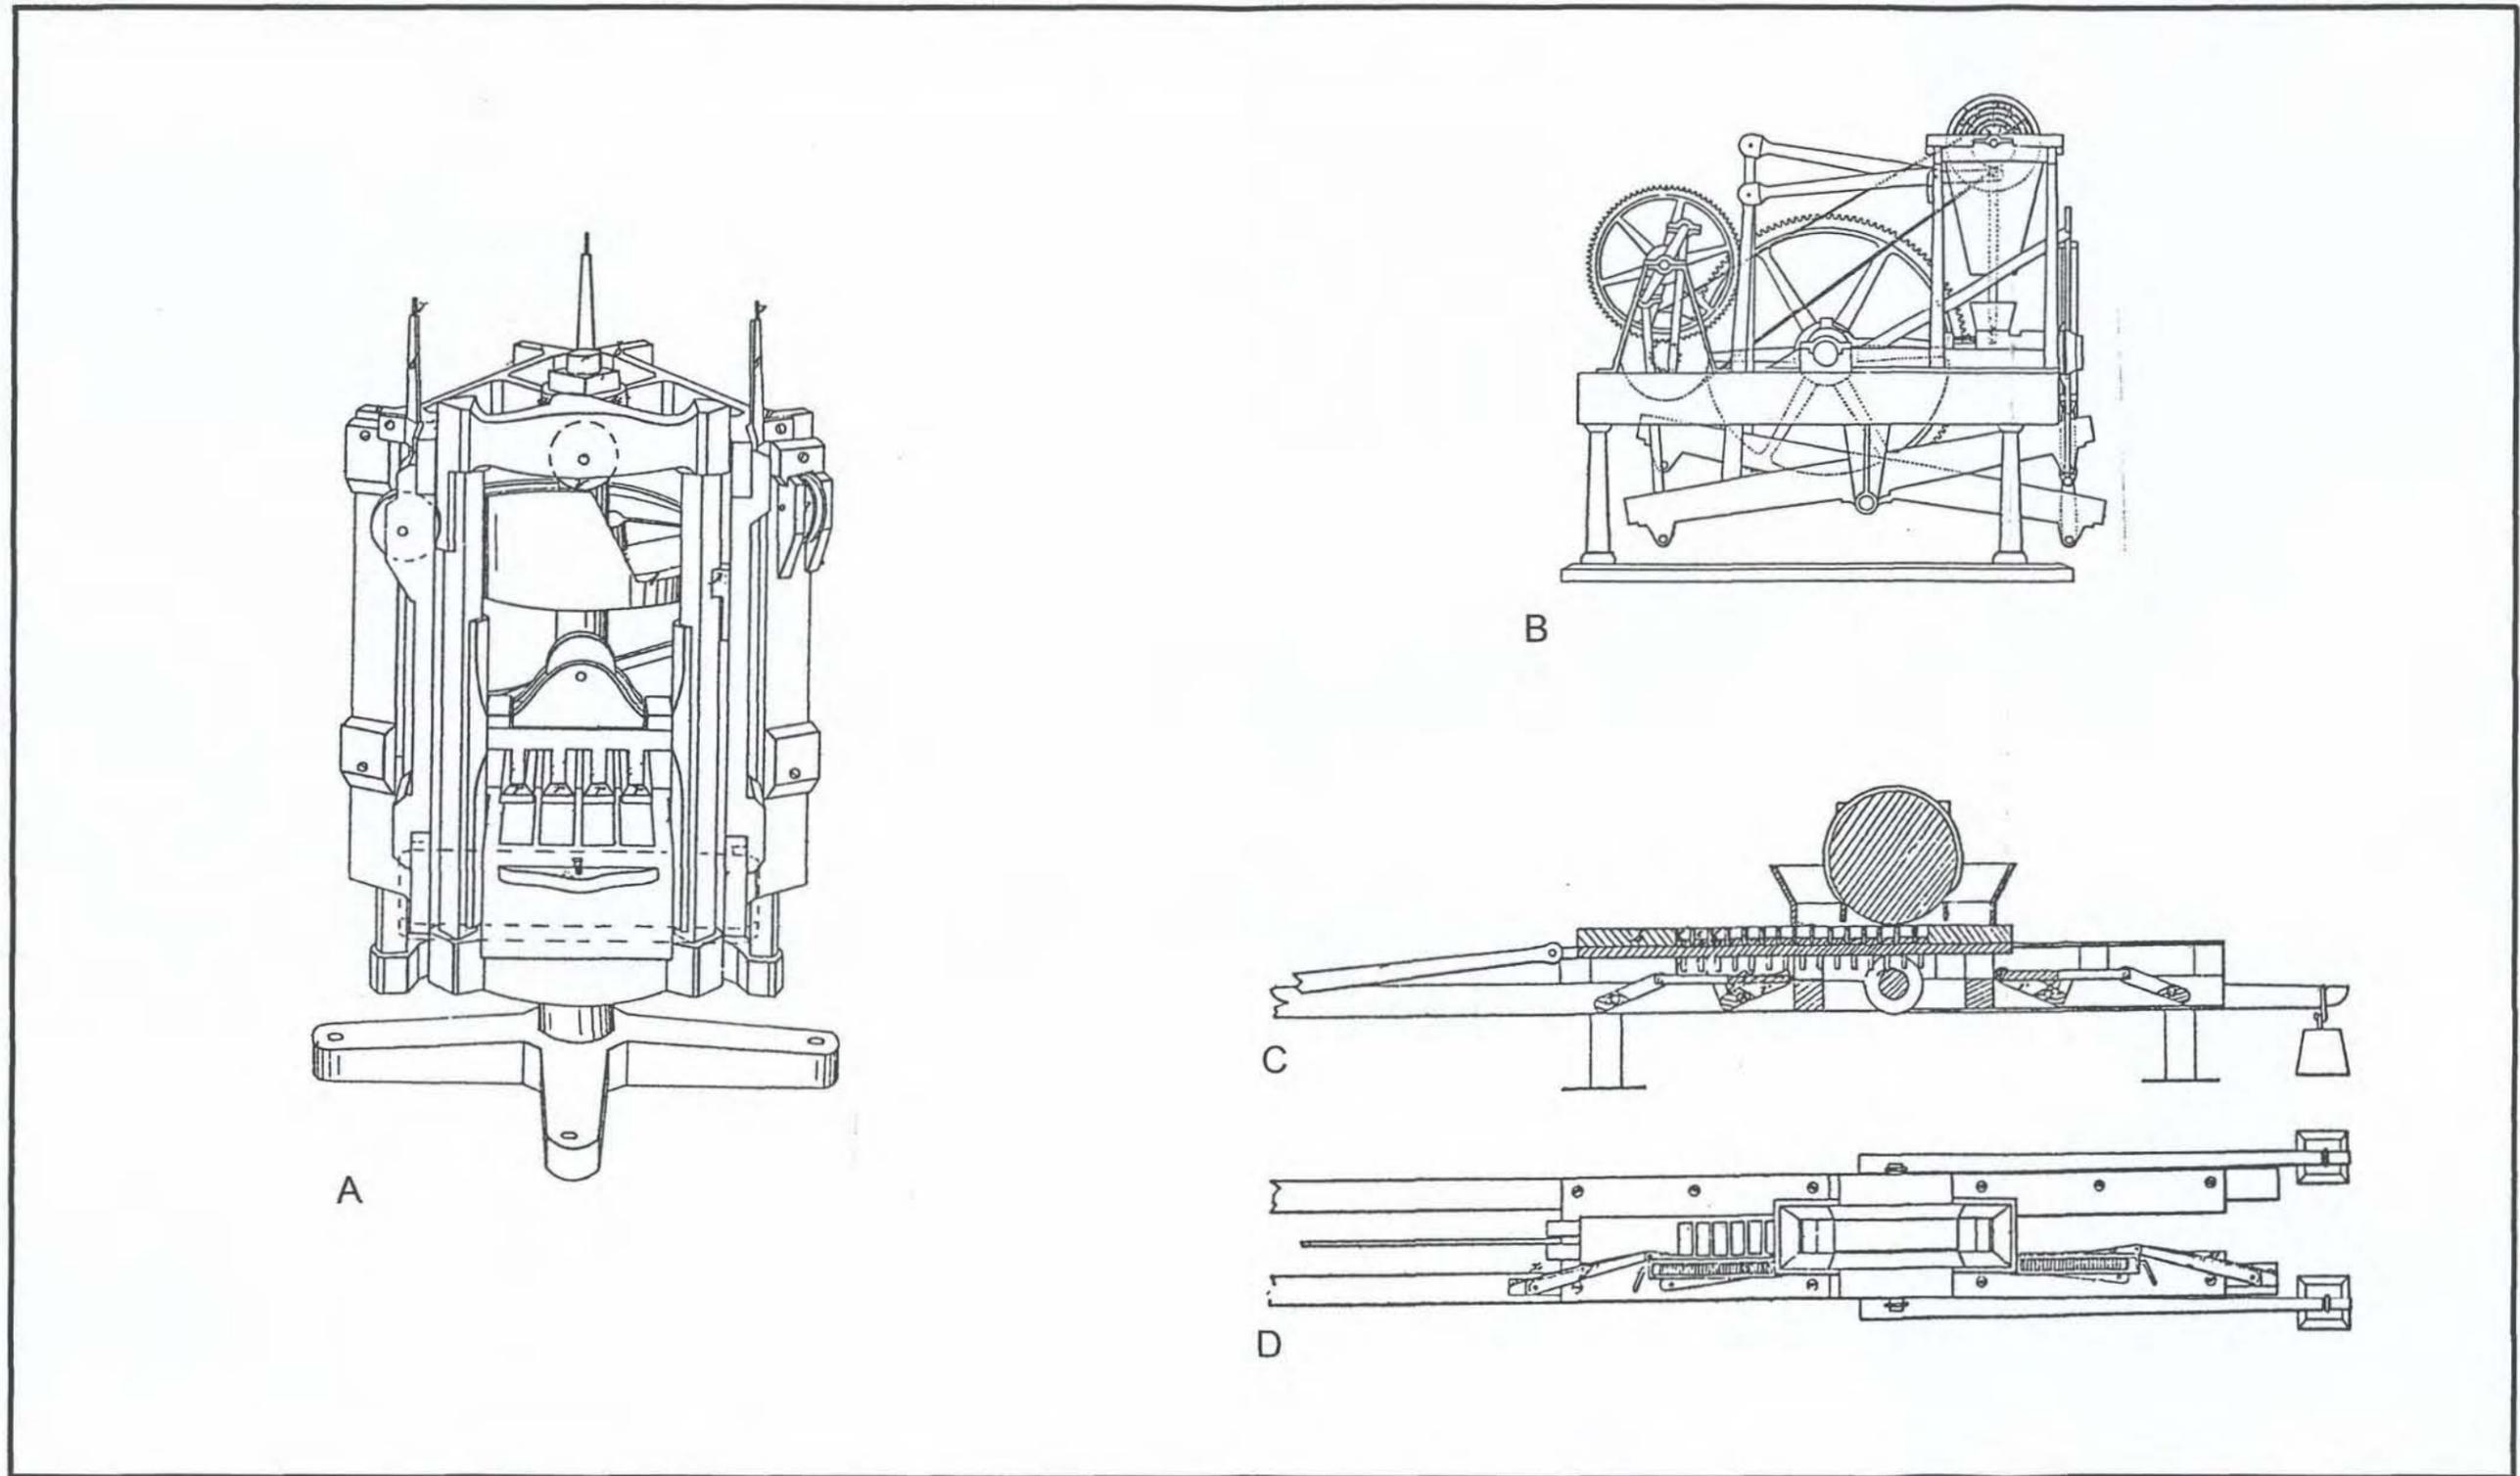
Patent drawings of three mechanized brick molding machines (from McKee 1974).
